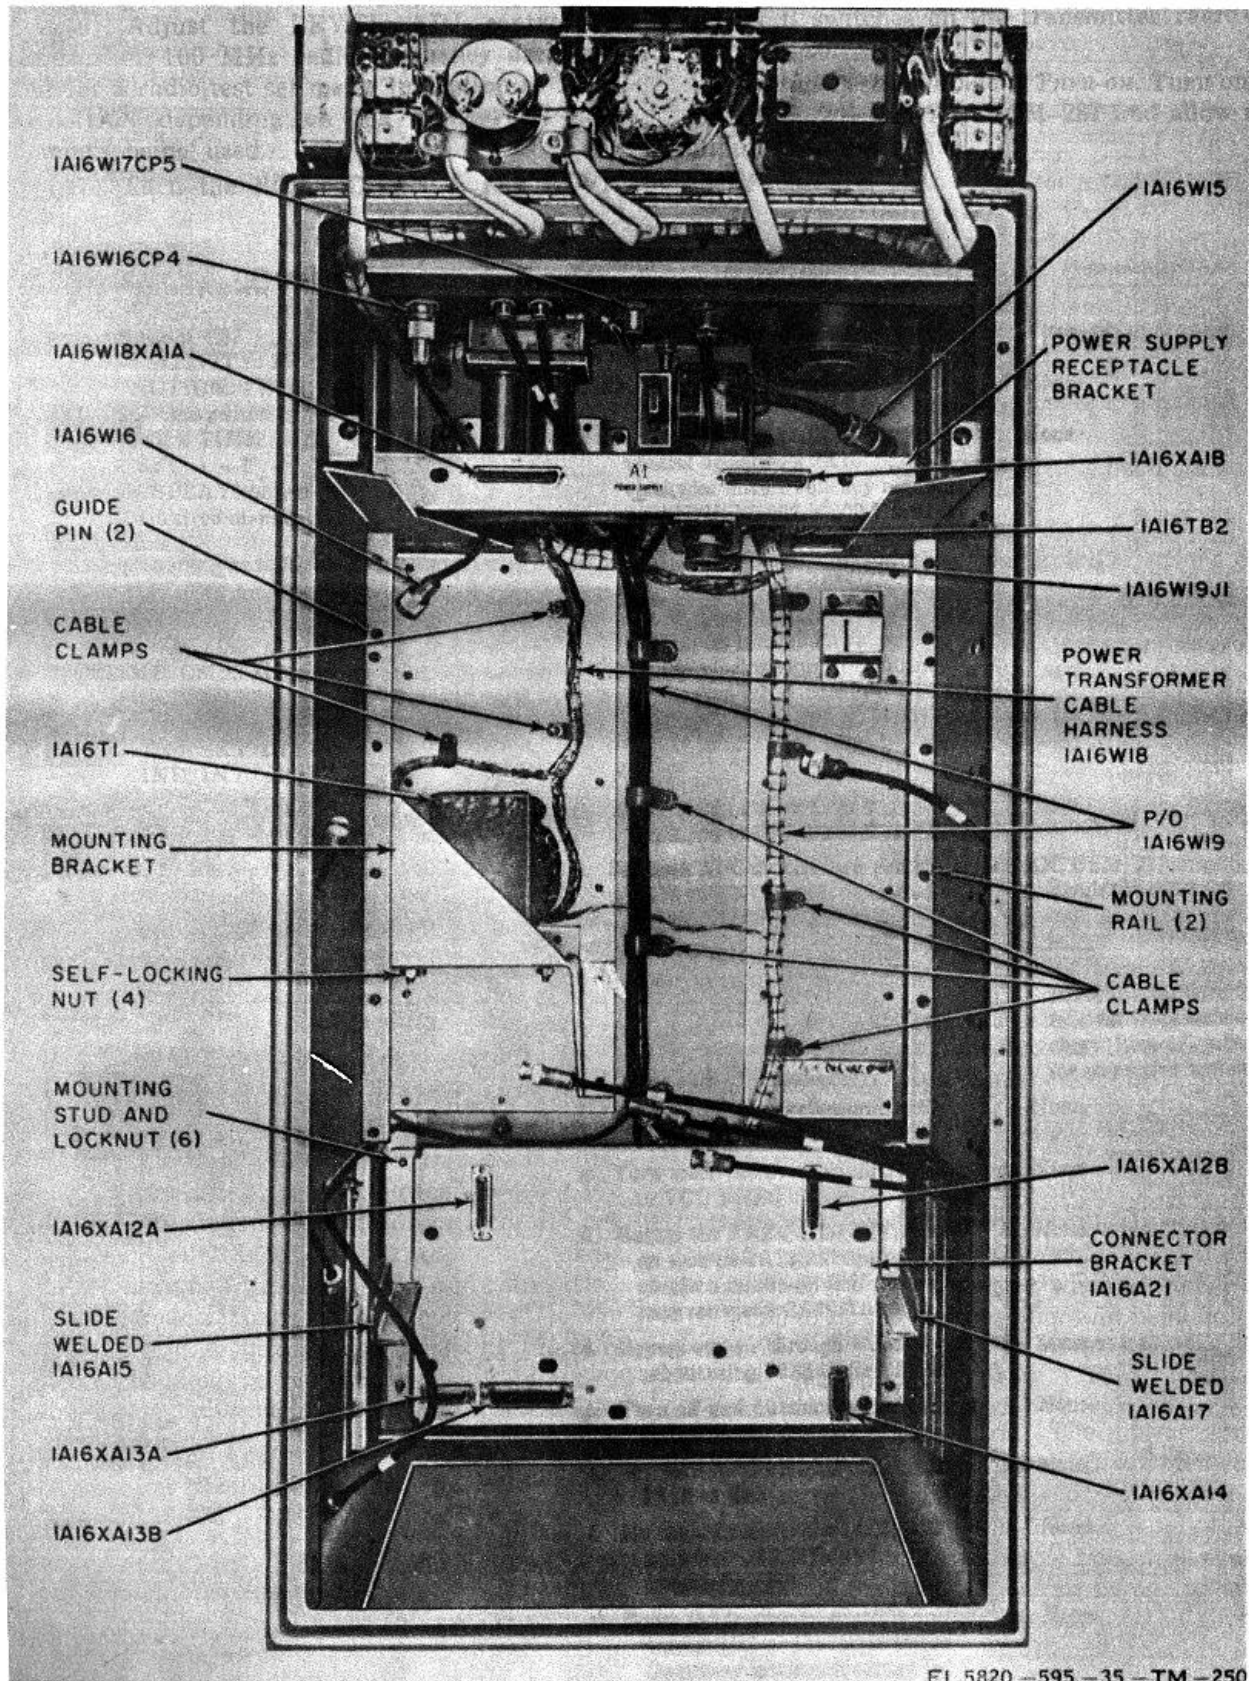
Transmitter cabinet 1A16, front view partially disassembled, parts location.
